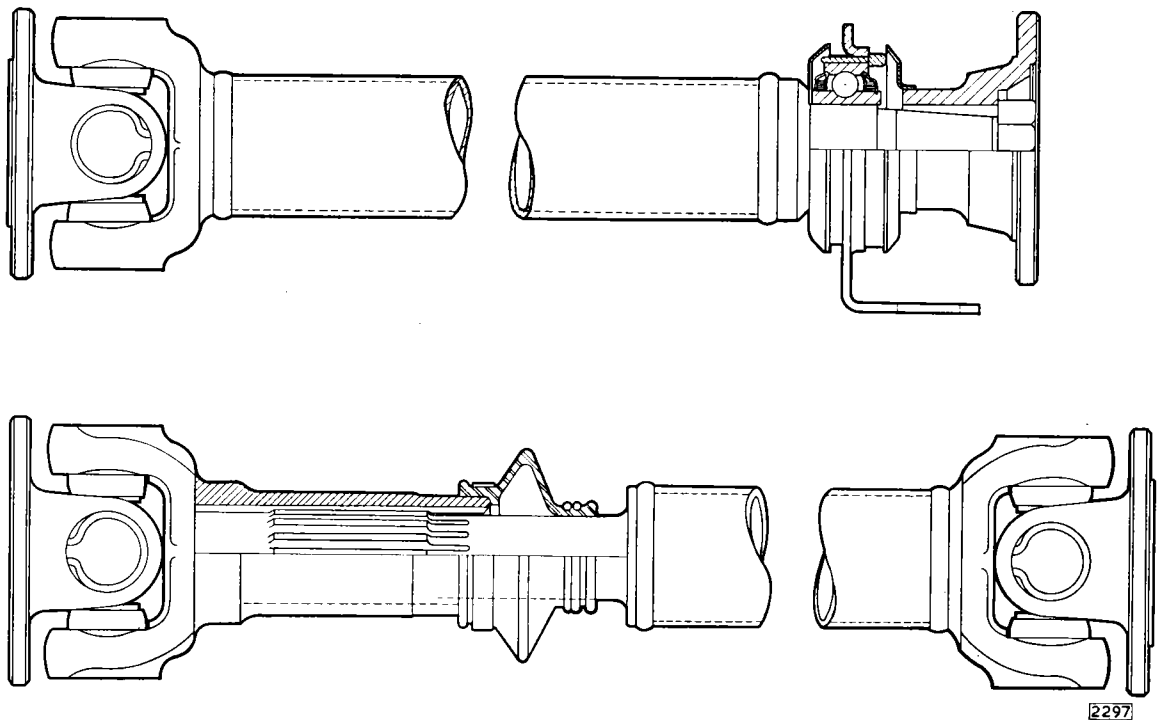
Front propeller shaft showing centre bearing (Upper illustration), Rear propeller shaft (Lower illustration)
